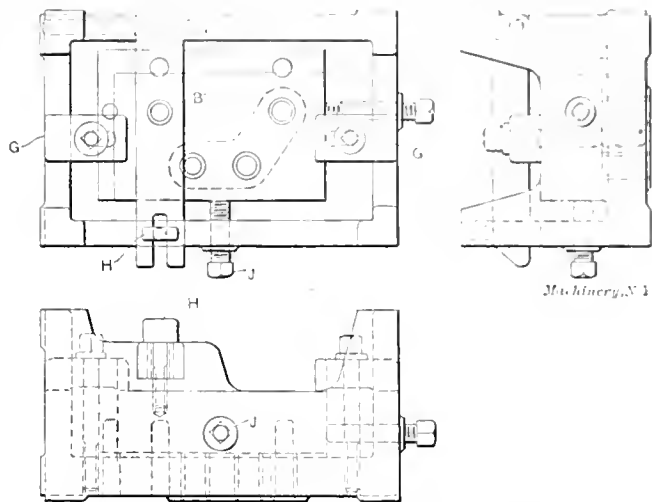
Jig where Thrust of Drilling Operation is taken by Clamps.
